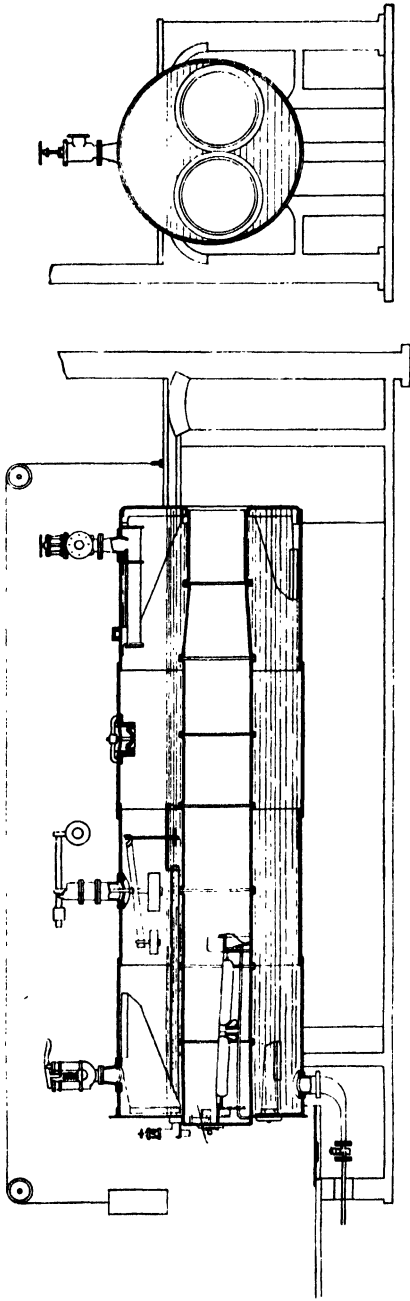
SECTION OF SIMPLE SETTING FOR LANCASHIRE BOILER
